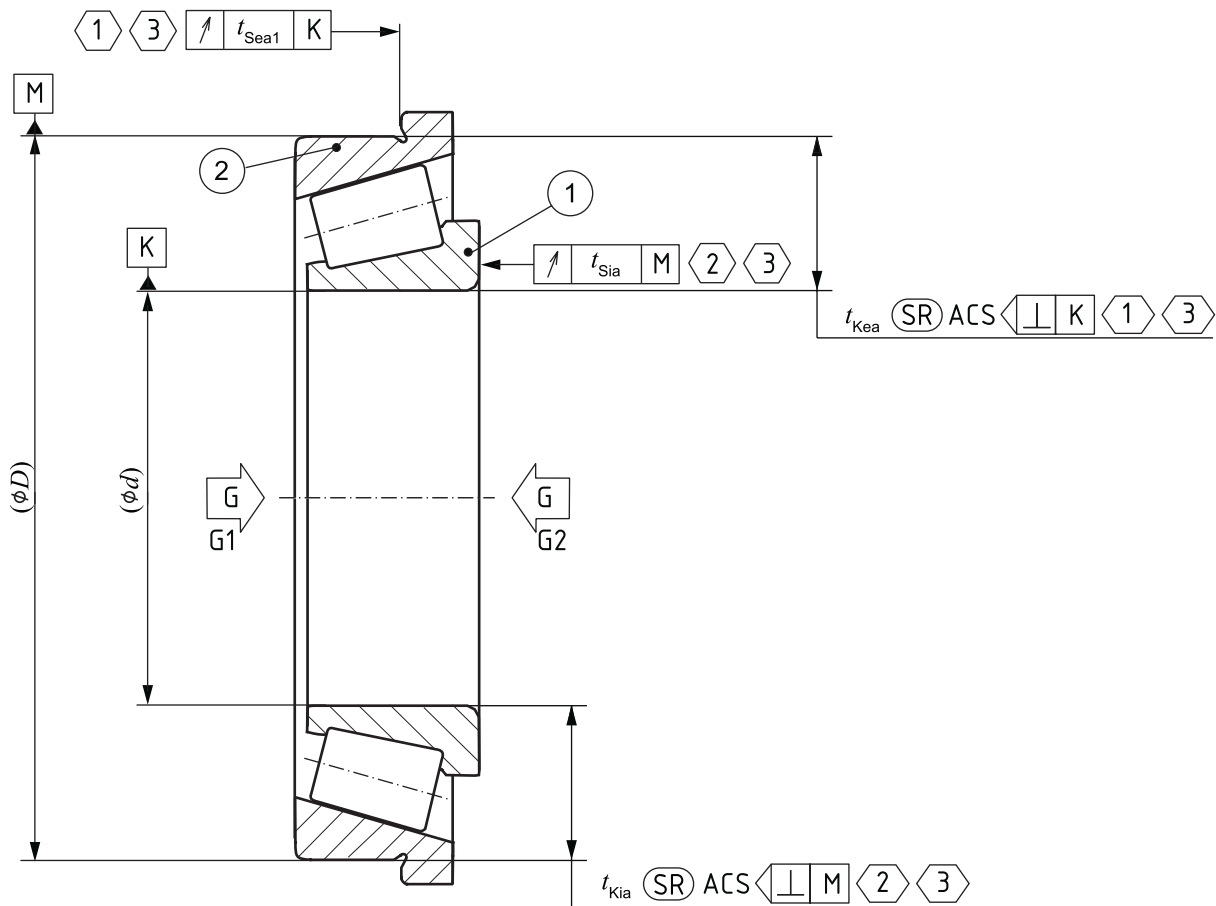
Geometrical tolerances for assembled bearing with flanged outer ring —
